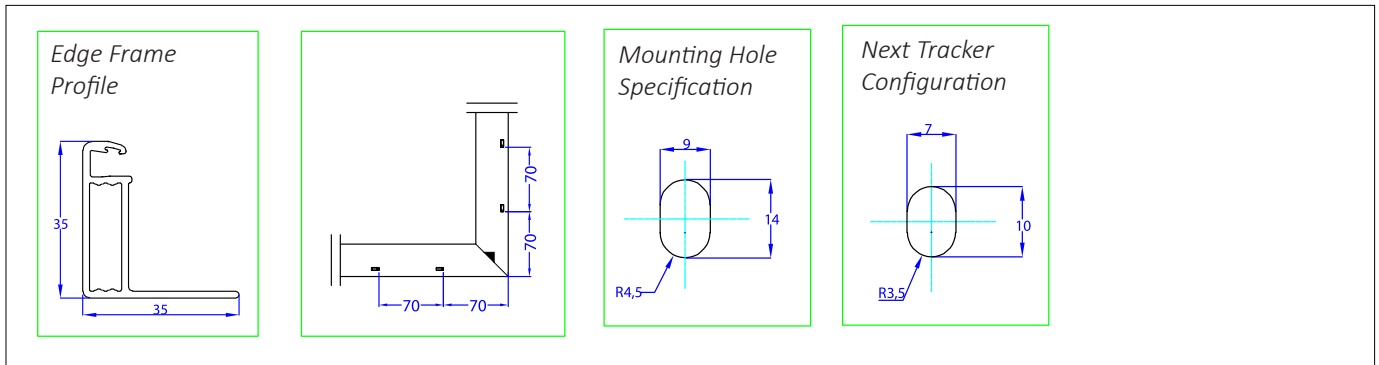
Aluminum (Glass-Backsheet) 1762/1134
